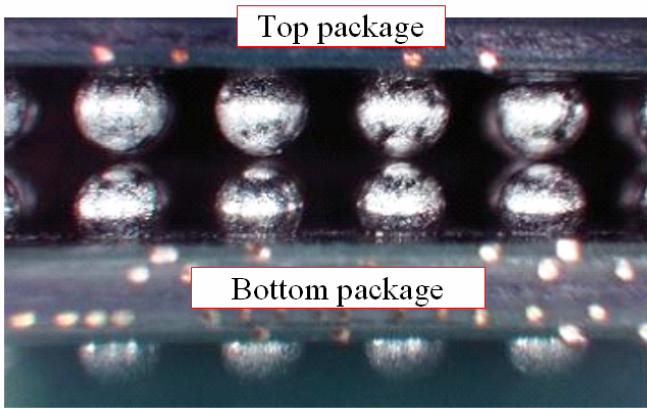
A cross section showing the packages just prior to reflow. One sees sphere-to-sphere interface of the top package resting on the bottom package solder-on-pad (SOP)
